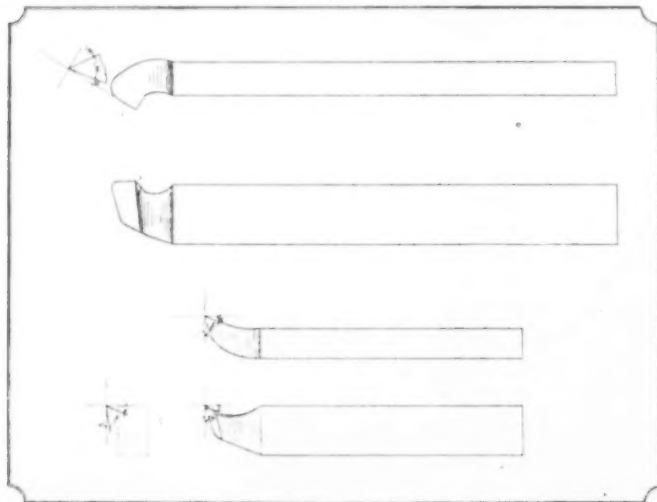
PROPER SHAPE FOR TOOLS FOR WORKING MONEL METAL.
